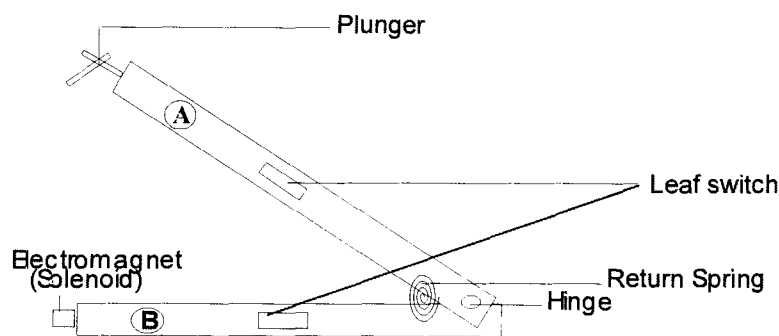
Mechanical Assemblage of the Sealing Machine
